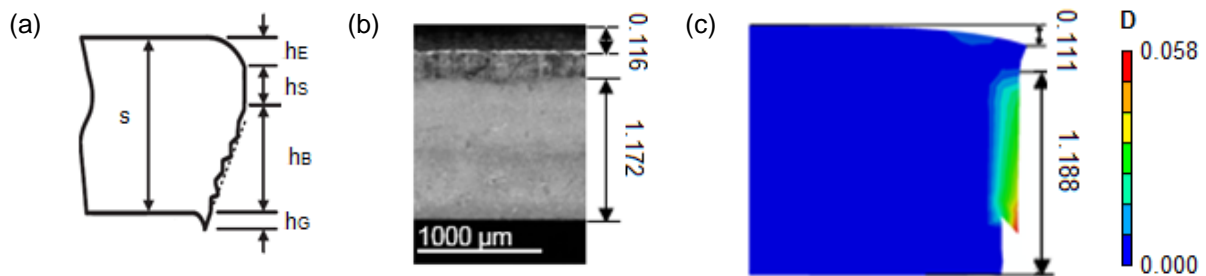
The blanked surface characteristics (a) h_E , h_S , h_B , h_G represent height of rollover, clean-shear, fracture, and burr parts, respectively [14]. S is the initial thickness of sheet; (b) the experimental data which was measured with accuracy of $1.0\ \mu\text{m}$ [10]; and (c) the simulation results in terms of damage parameter (all dimensions are in mm).
